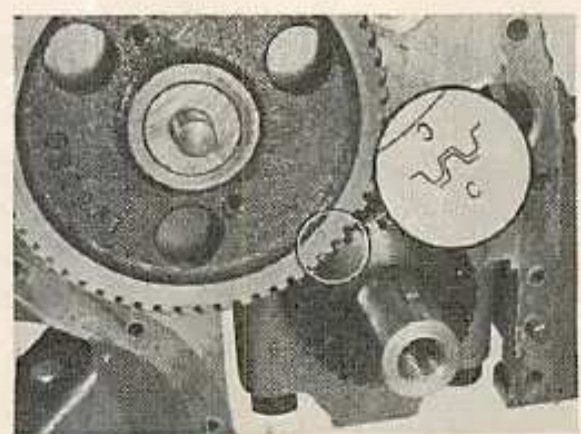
Valves are properly timed on all models when "C" marked tooth on crankshaft gear is meshed with "C" marked tooth groove on camshaft gear as shown.
